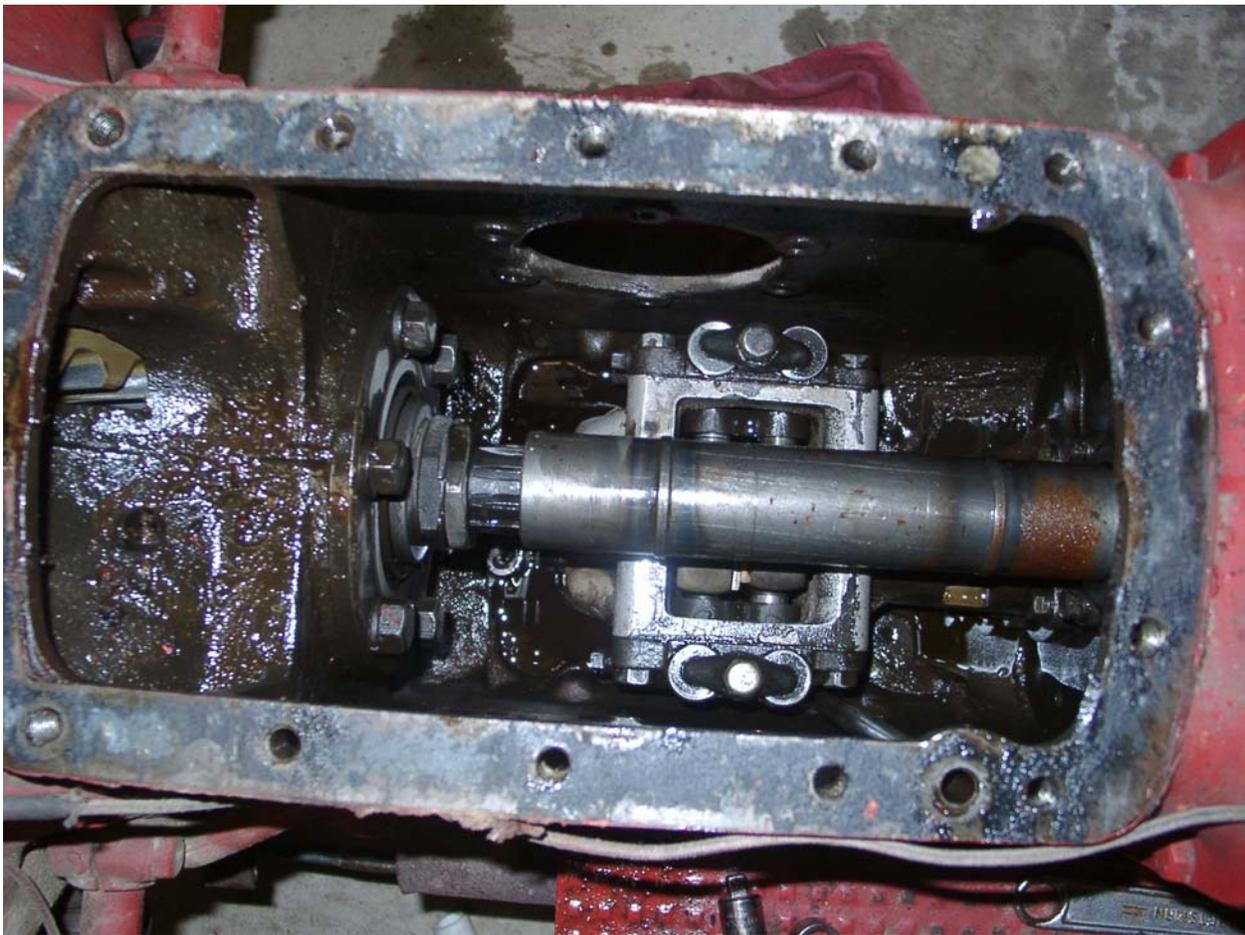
Center Housing / Top Cover Removed Showing Hydraulic Pump.
